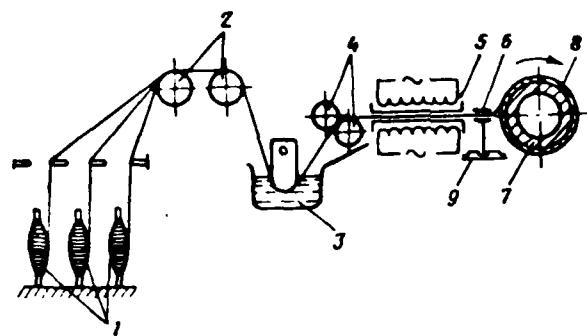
Schematic of spooling machine: 1 - spool; 2 - guide pulleys; 3 - puddle with bonding agent; 4 - squeeze rolls; 5 - heating chamber; 6 - packer; 7 - mount/mandrel; 8 - blank of glass roving, glass filament, glass-fiber-reinforced veneer; 9 - guide of packer.
